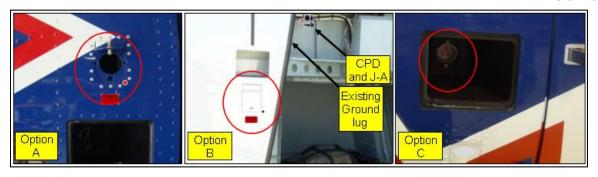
Shore power plug. Locate plug door kit in panel above or below step or locate plug in rear of step. When locating in step install plug from front and reinforce back side of step with supplied door kit doubler or field fabricate. Light may be located under door, next to or adjacent to plug, refer to drawing 02840, instructions TN02840, TN02070, and TN03039. Locate CPD and junction in serviceable area in baggage compartment or near rear of plug. Use existing ground lug when available.
